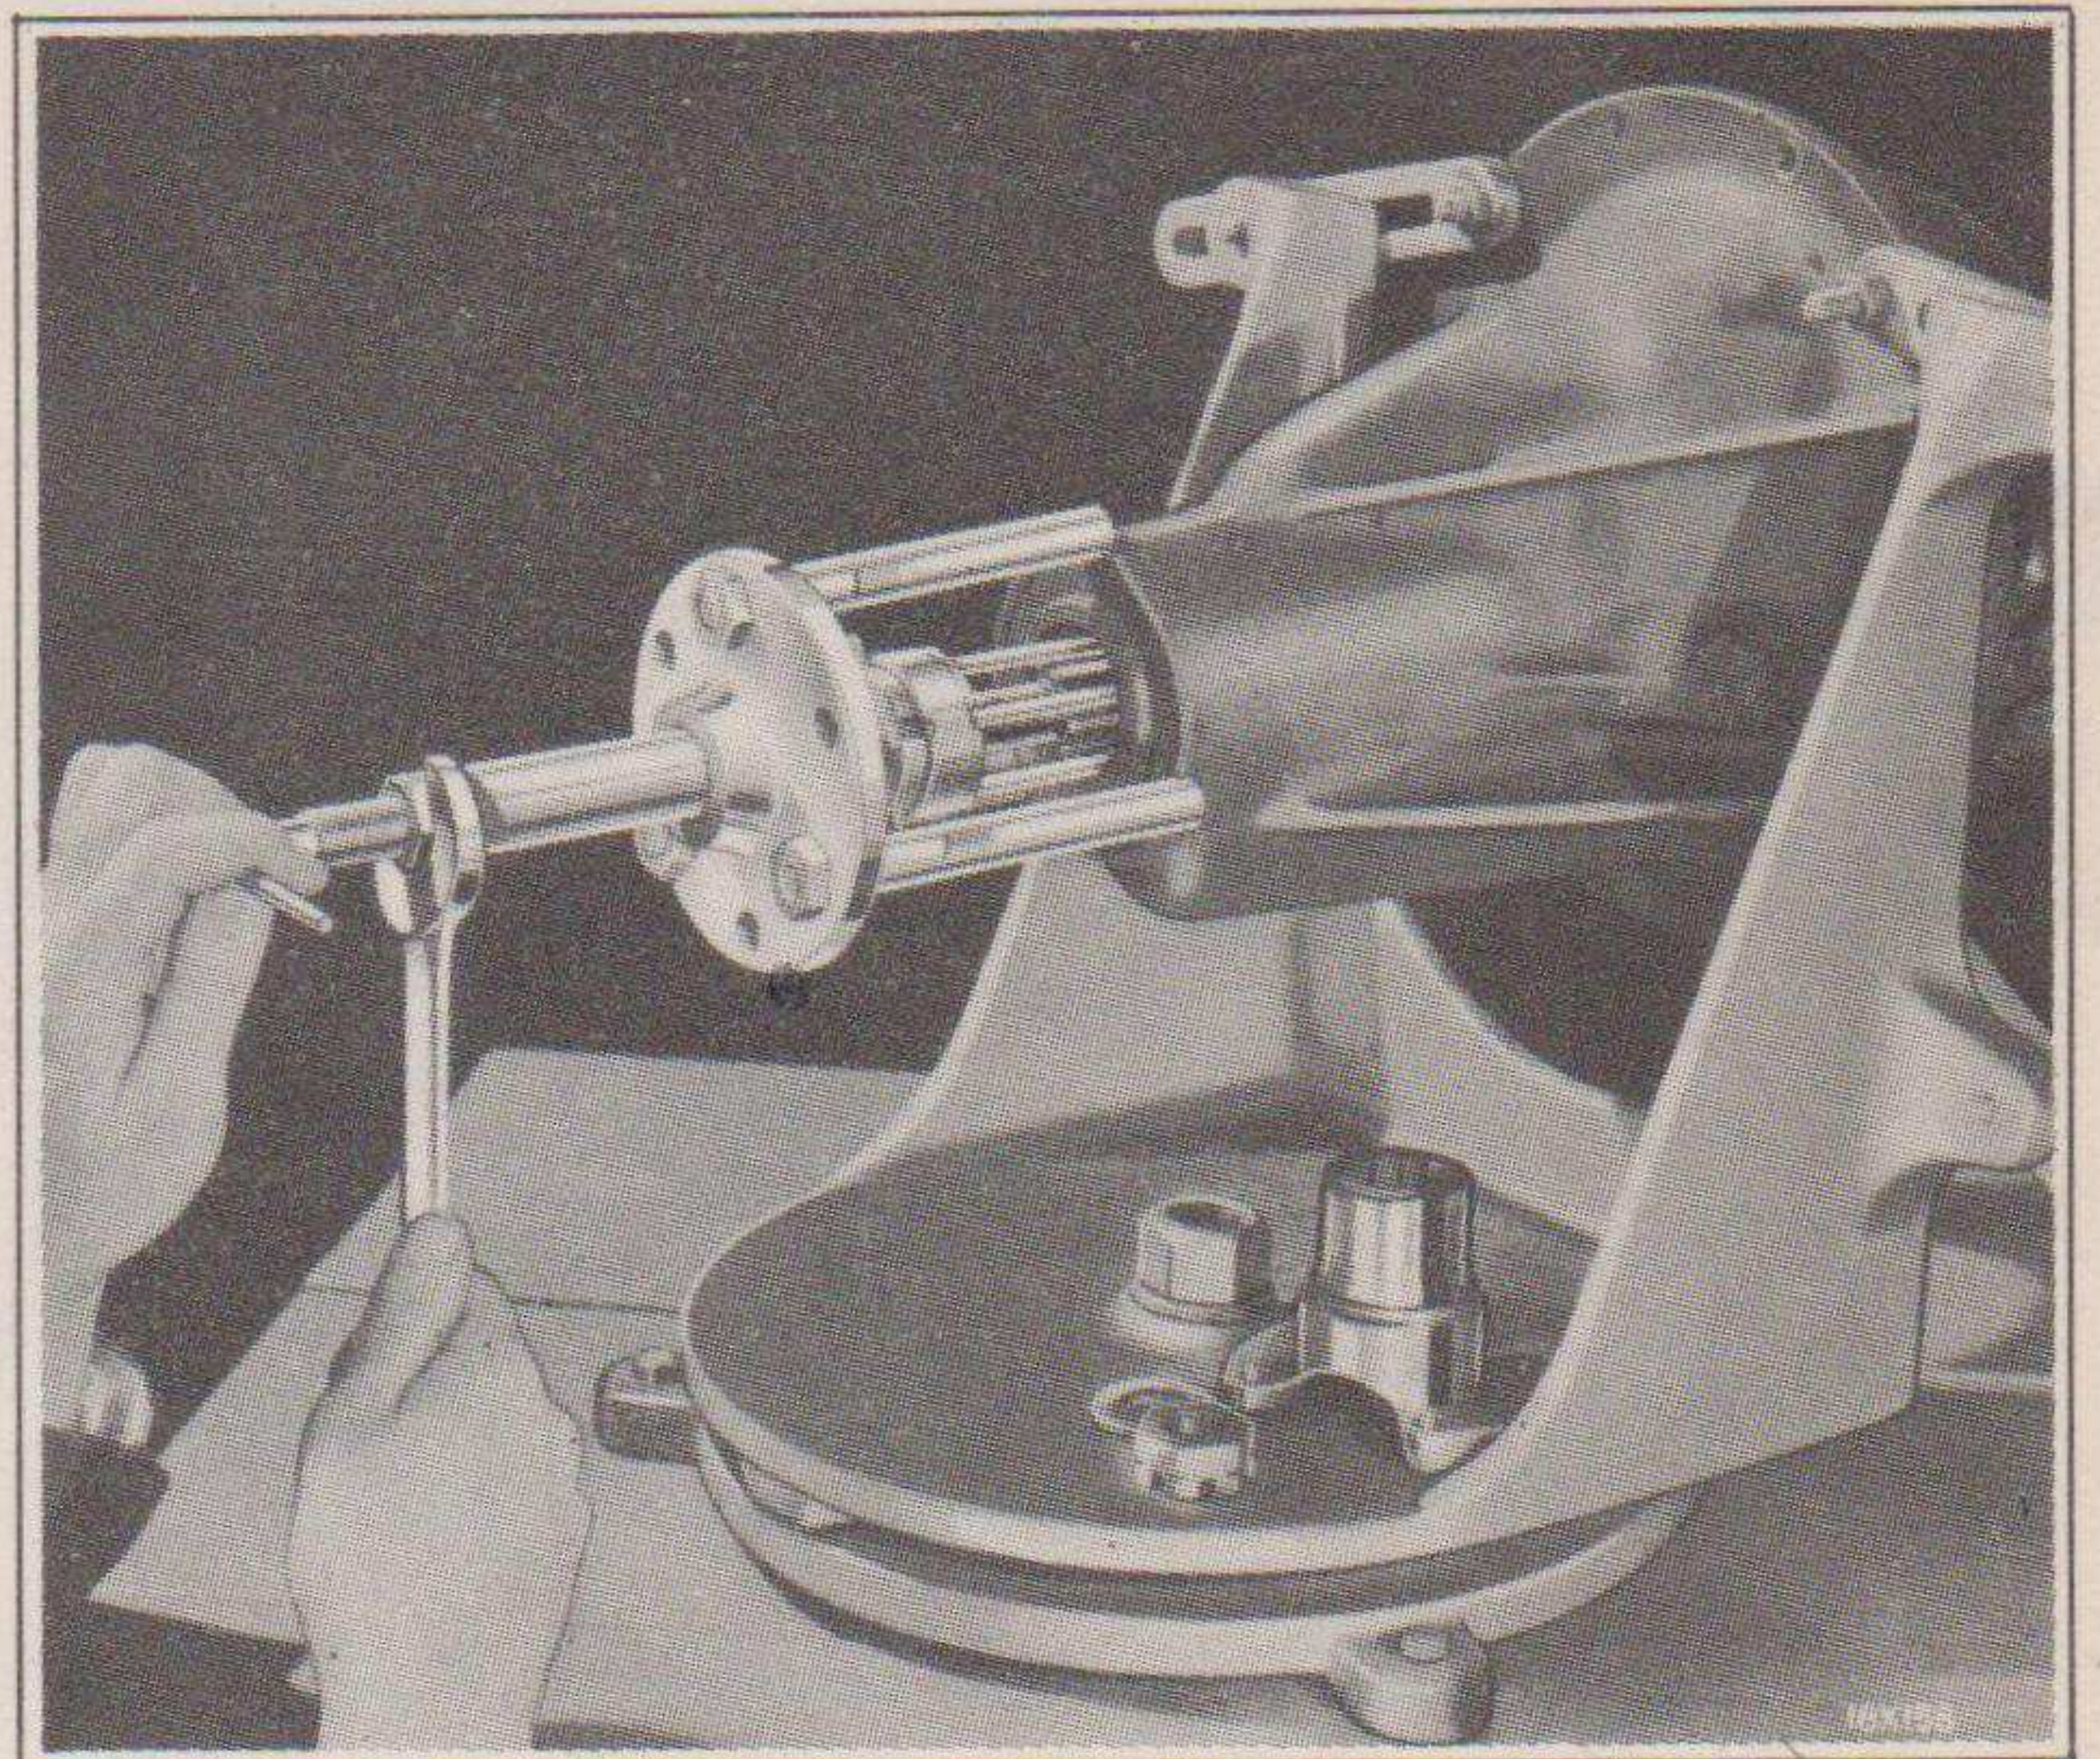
Removing Drive Pinion Bearing Oil Seal with Tool C-358
